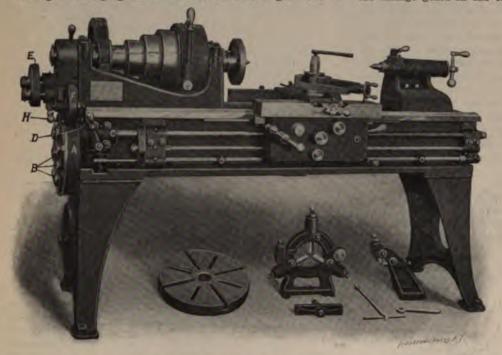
New Engine Lathe of the Springfield Machine Tool Co.
